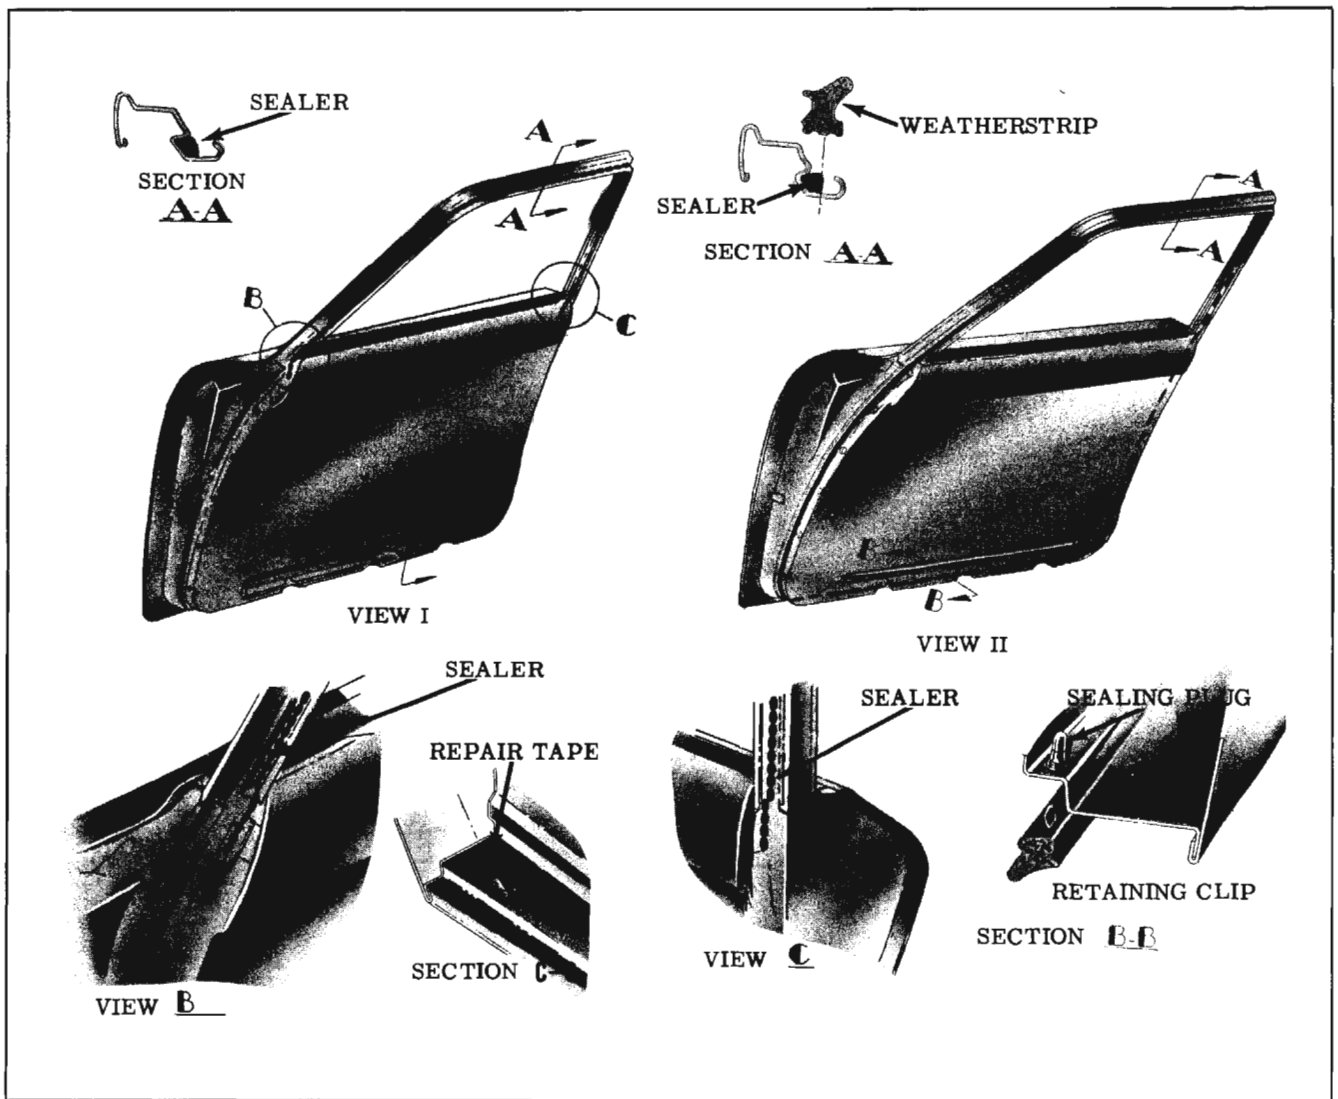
Repairing Weatherstrip Attaching Hole Sealing Plugs
